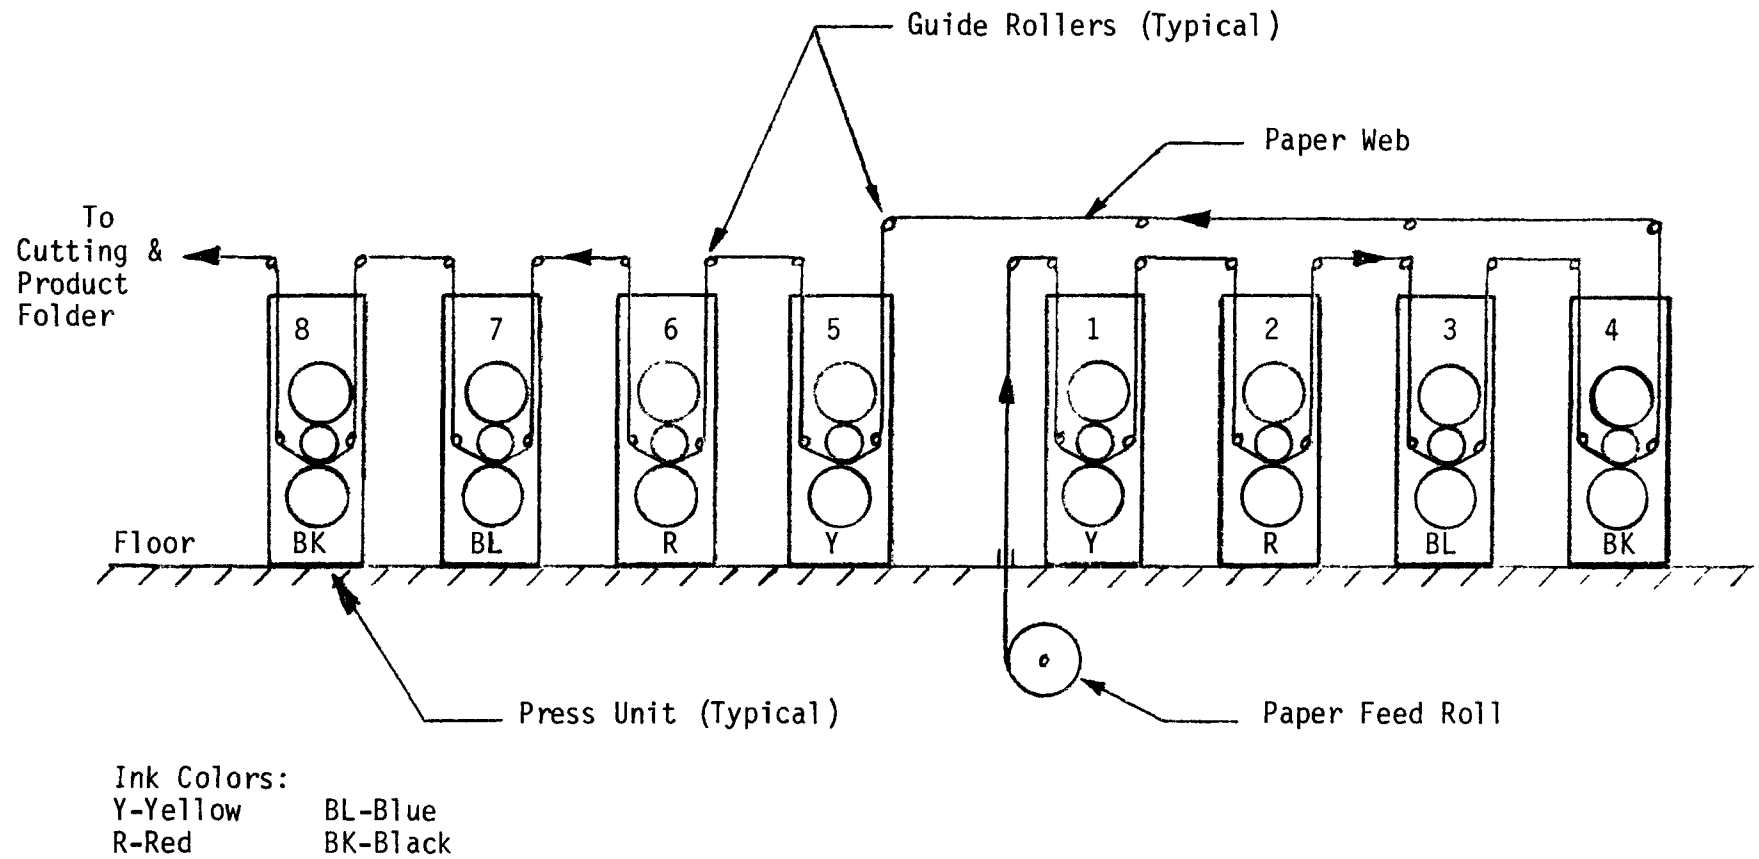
Schematic of a Typical Eight-Unit Rotogravure Printing Press
